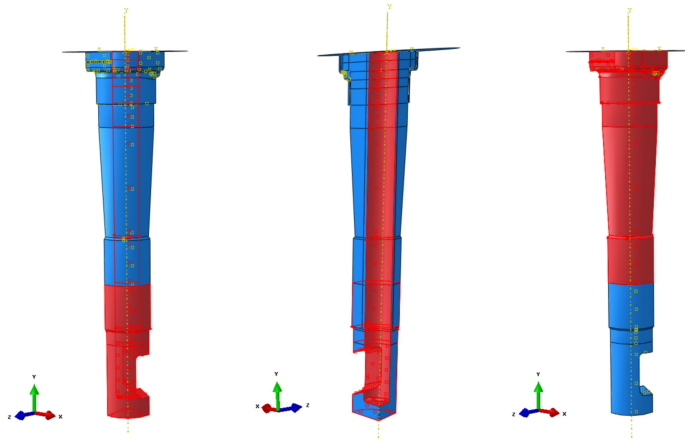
Left and center: surfaces directly in contact with the molten metal. Right: surfaces subject to air convection.
